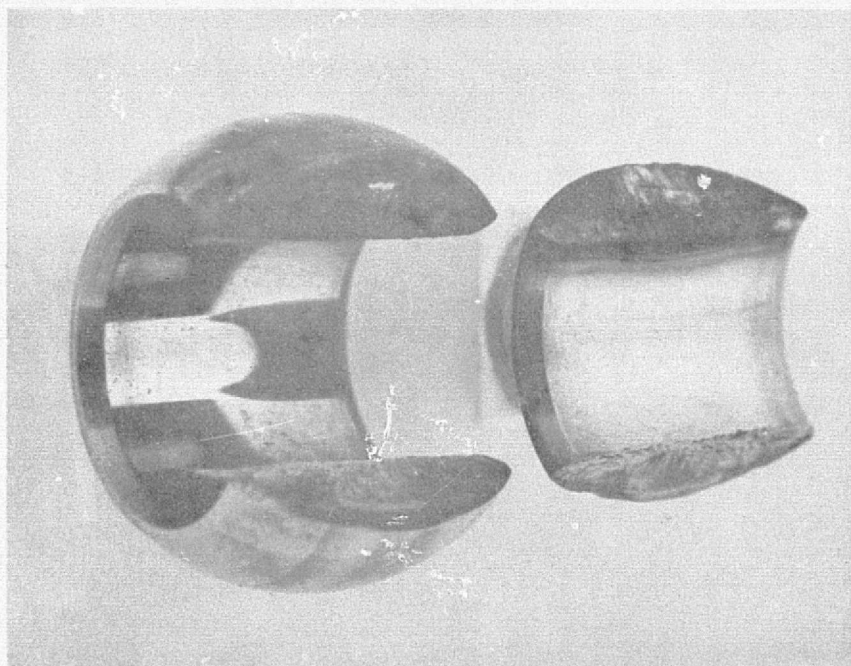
Design A Ball No. 6, which Suffered Two Radial Fractures. Initial Crack is Discolored from Frictional Heat.
